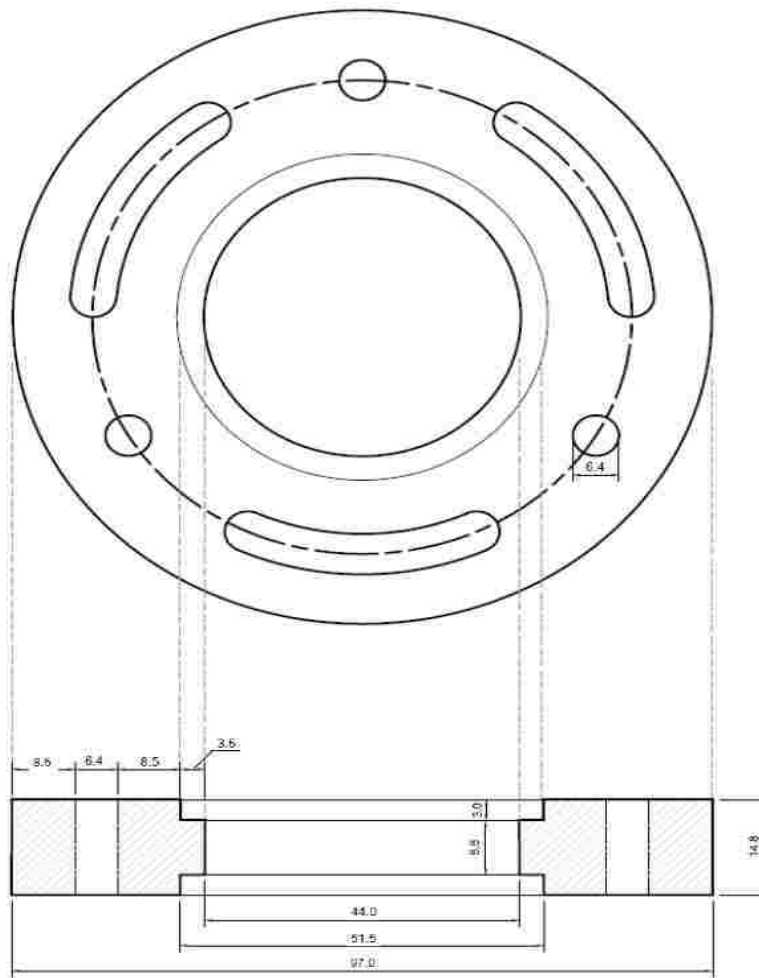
AutoCAD drawing of customized ceramic Spacer
